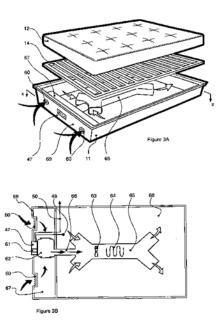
Exploded diagram of "Environmentally conditioned furniture".
